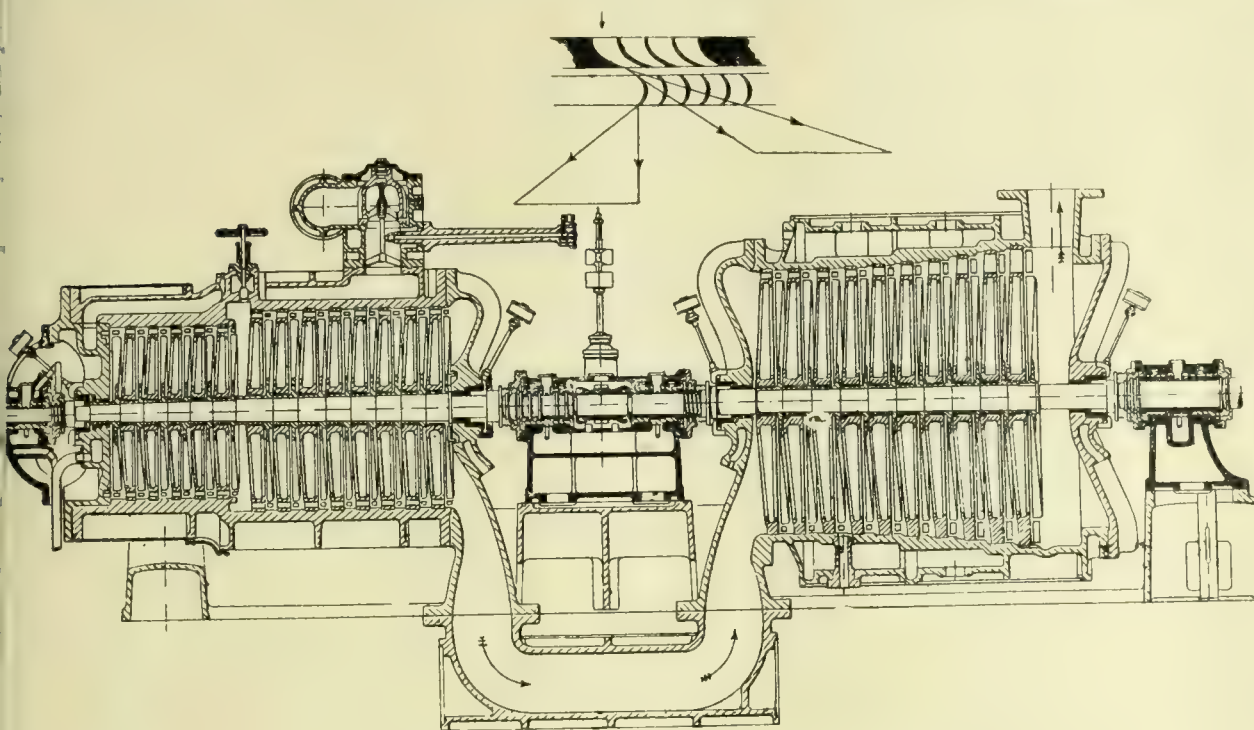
RATEAU TURBINE, BUILT BY SAUTTER HARLE, 1902.
